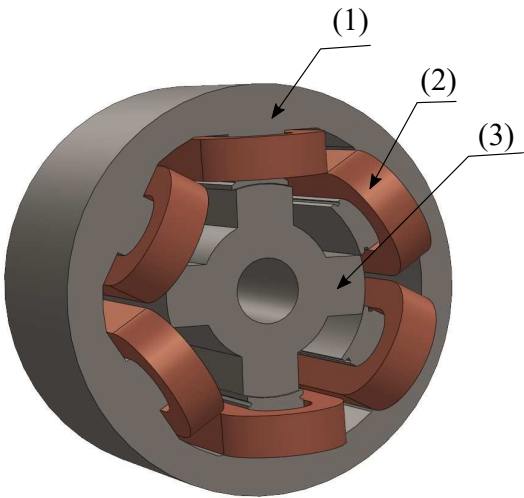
SRM machine active parts: (1) stator core, (2) windings, (3) rotor.
